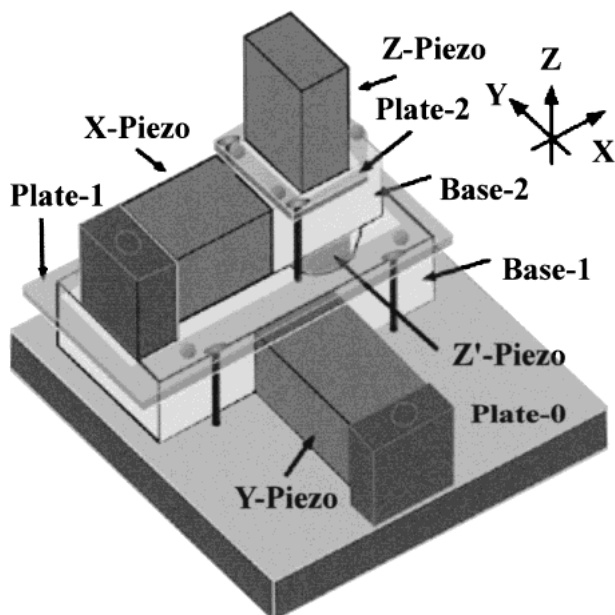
Scanner assembly. The piezo actuators are 5 mm long, 4 mm wide, and 2.7 mm thick. Base-2 (6 × 6.7 × 2.7 mm<sup>3</sup>) is clamped in the z-direction between Plate-2 and Base-1 via six steel ball bearings (three for the top, and the other three for the bottom). Base-1 (10 × 16.7 × 2.7 mm<sup>3</sup>) is also clamped in the z-direction between Plate-1 and Plate-0 via six steel ball bearings (three for the top, and the other three for the bottom). The bearings are 1 mm in diameter. Each clamp is made using three screws placed close to each of the ball bearings. A sample stage is attached to the top of the z-piezo.
